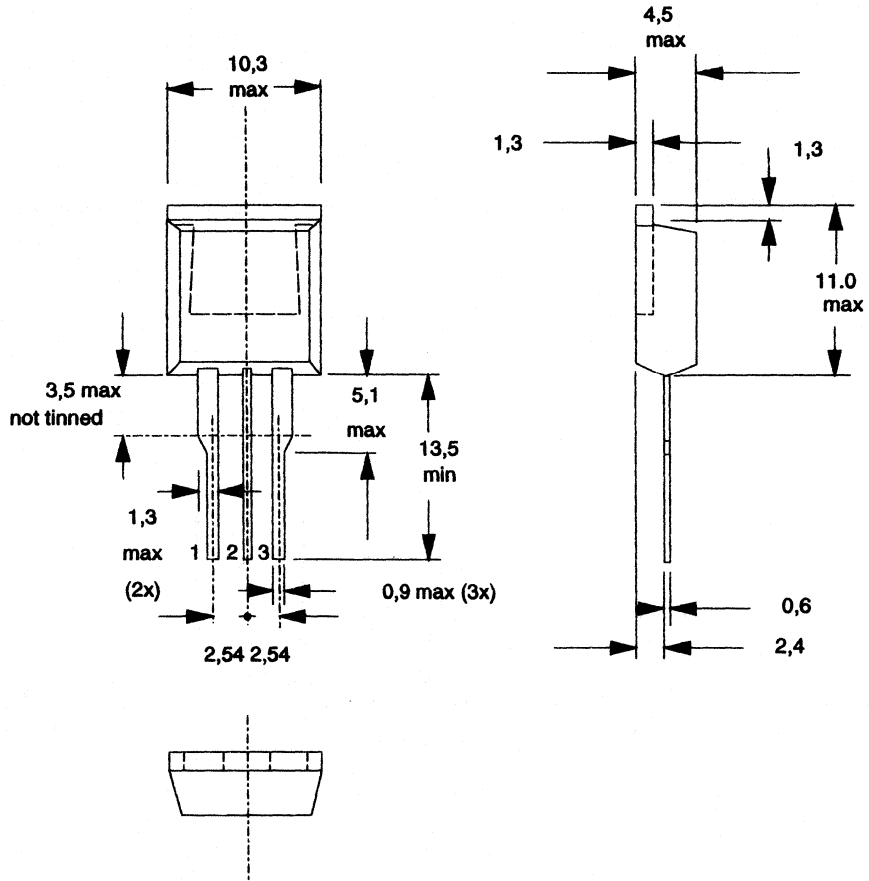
SOT226 Low profile version of TO220AB; Pin 2 connected to mounting base.
